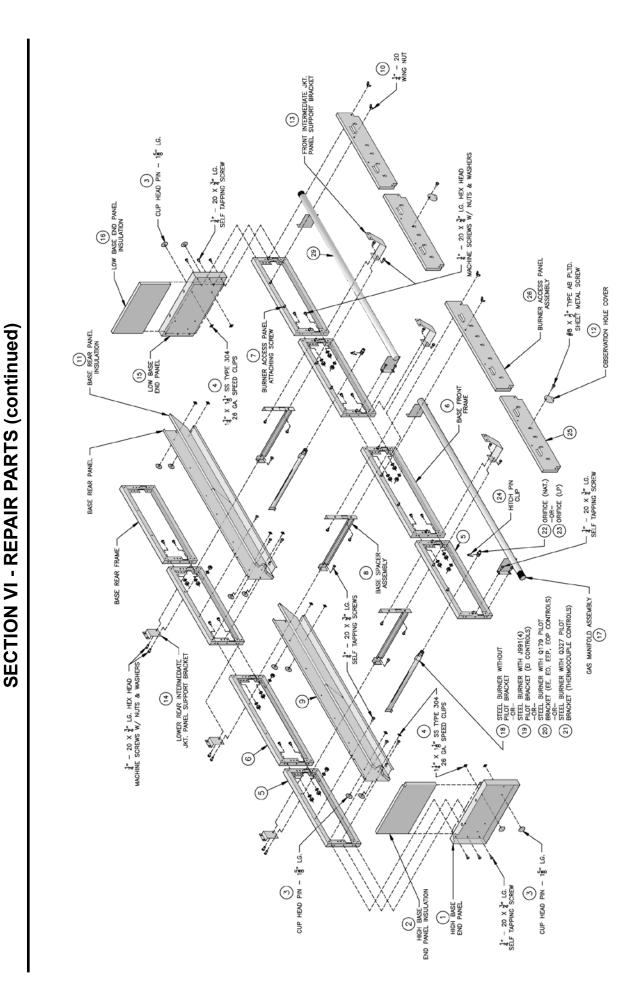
BASE PARTS (5006B THRU 5014B)
